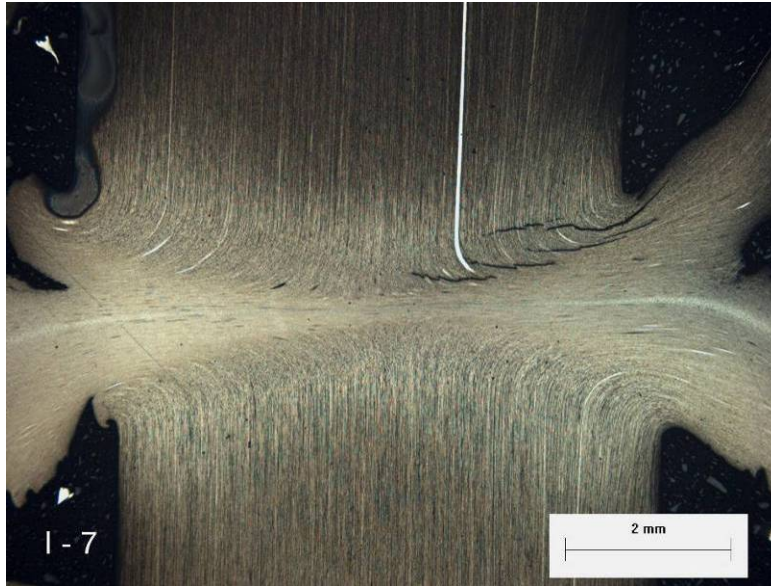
Weld Produced with Typical Two-stage Force showing Cracking in Far Heat Affected Zone
